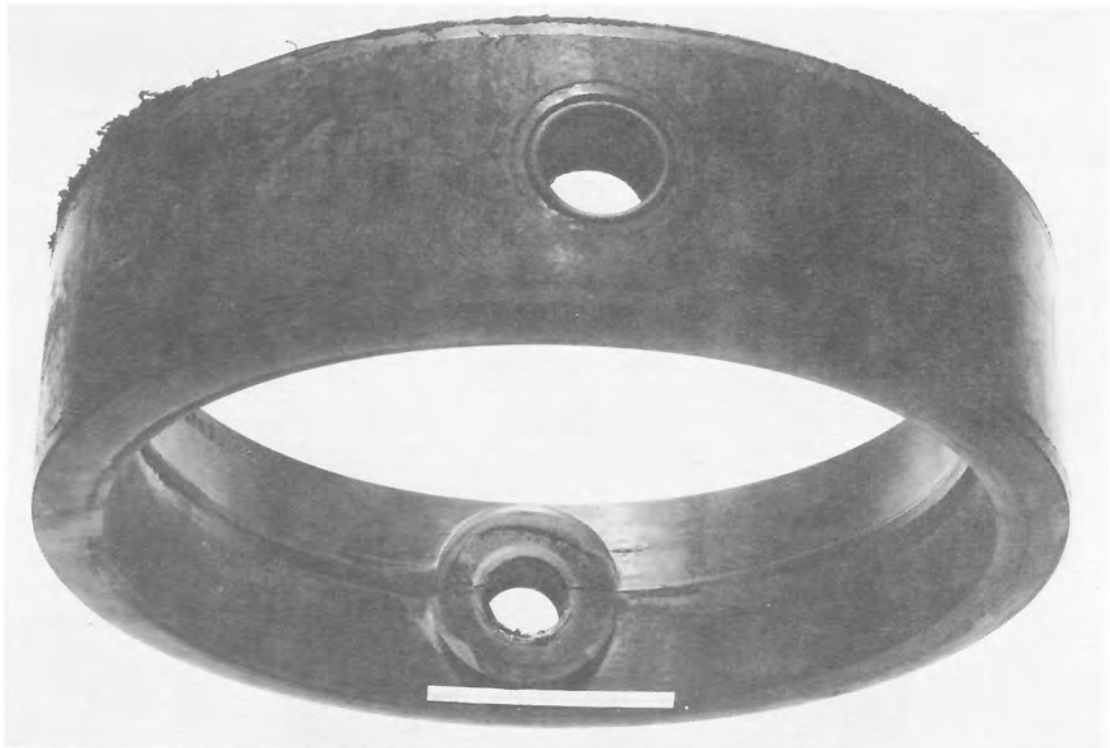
CL. Damaged replaceable rubber seat removed from valve body. Closeup shows damage to opposite end. Major damage was to molded rubber flats. Photos P801-D-74522 (upper), P801-D-74523 (lower)
